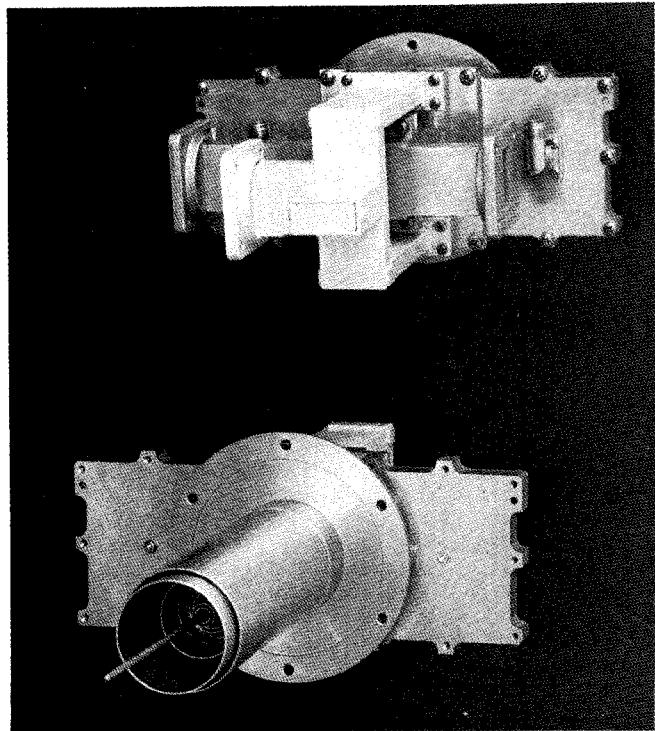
END-SECTION ROTARY JOINT ASSEMBLIES
